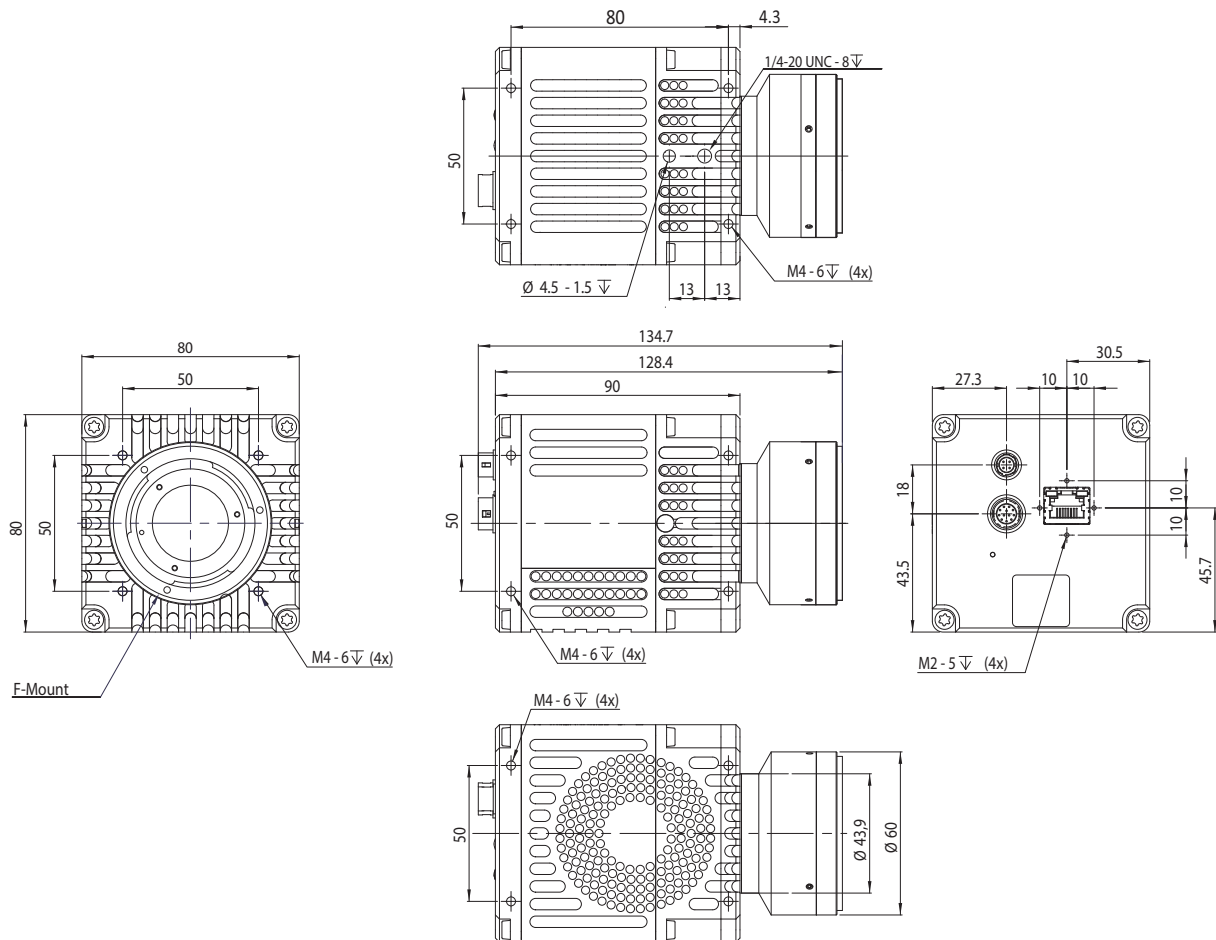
Dimensions Goldeye G-032 with F-Mount lens adapter
